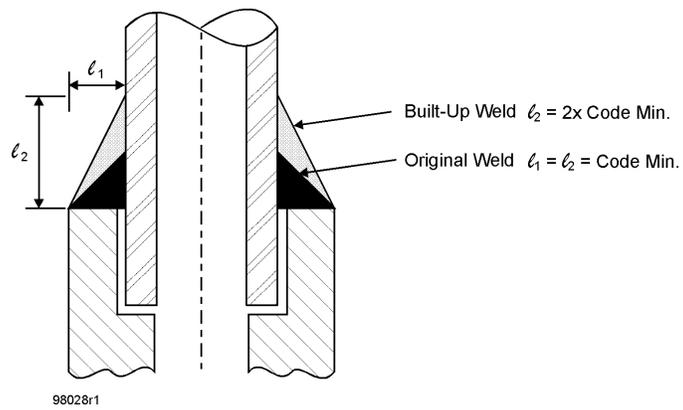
1 x 1 Weld Built Up to 2 x 1
